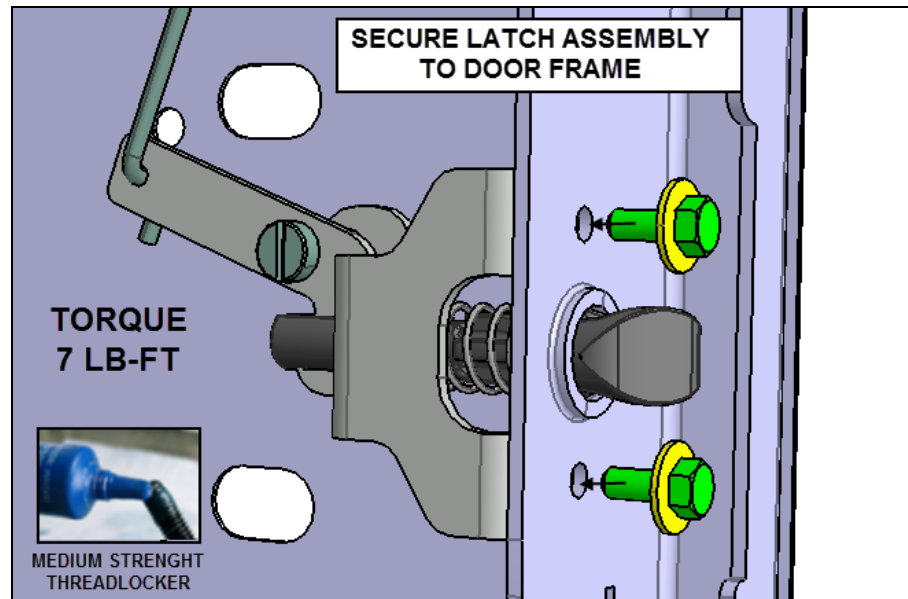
SECURING LATCH MECHANISM TO DOOR FRAME
